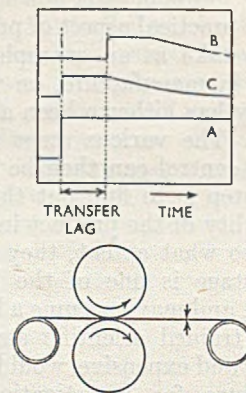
Rolling Mill Fitted with Gauge Control, Showing Transfer Lag.
